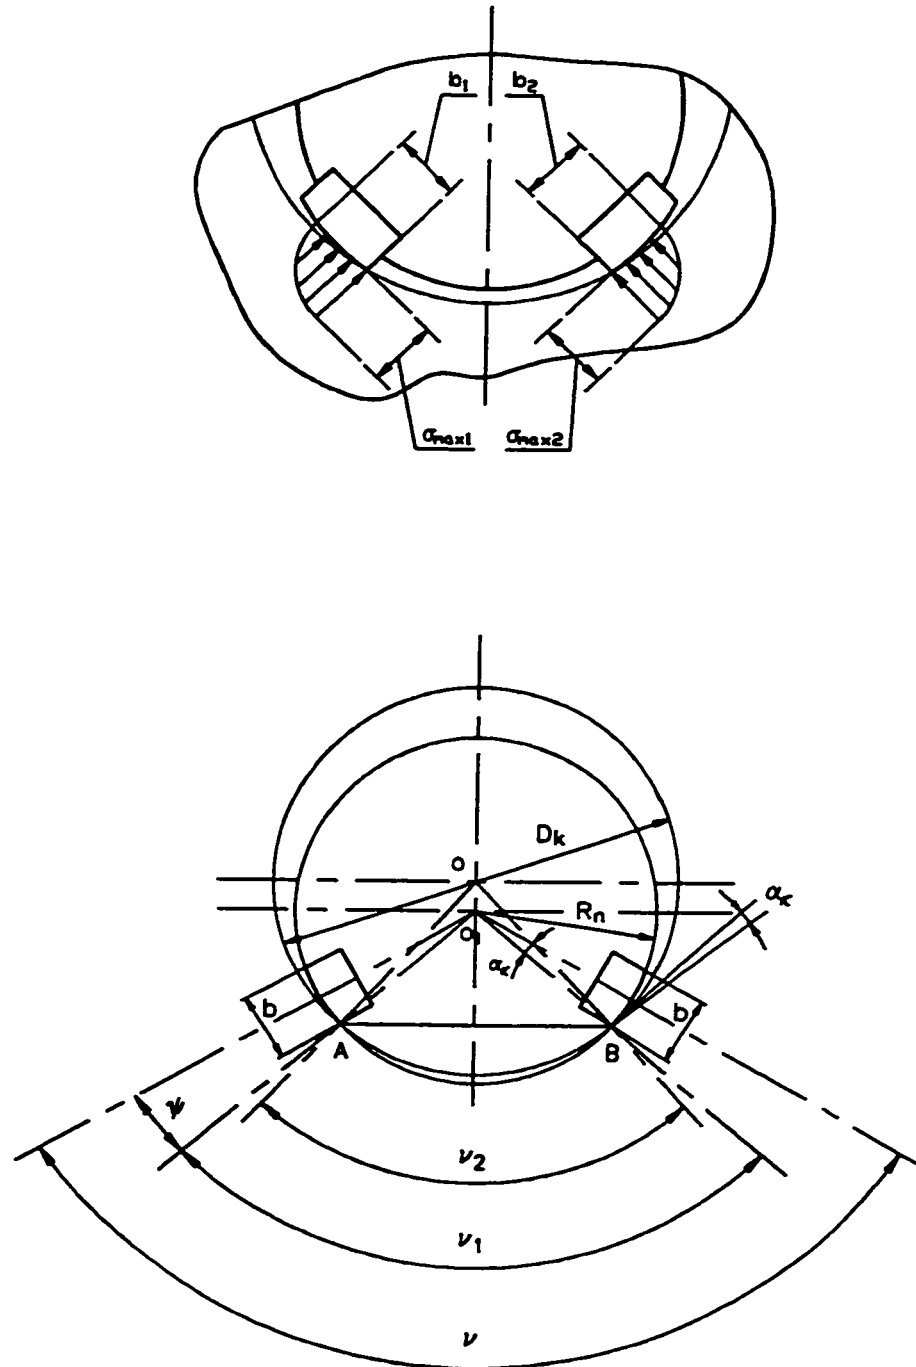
SP Tool Mating with Piloting Hole (Transverse Section Plane)
